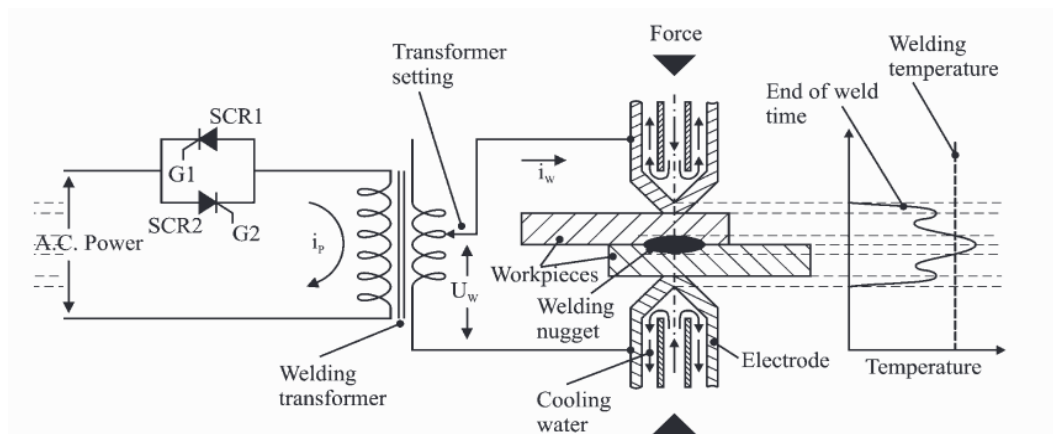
Schematic Representation of Resistance Spot Welding [2]
